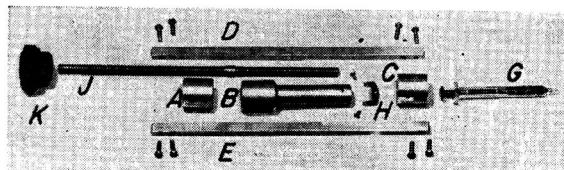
Exploded photograph of drive mechanism for differential-screw ultramicroburet
